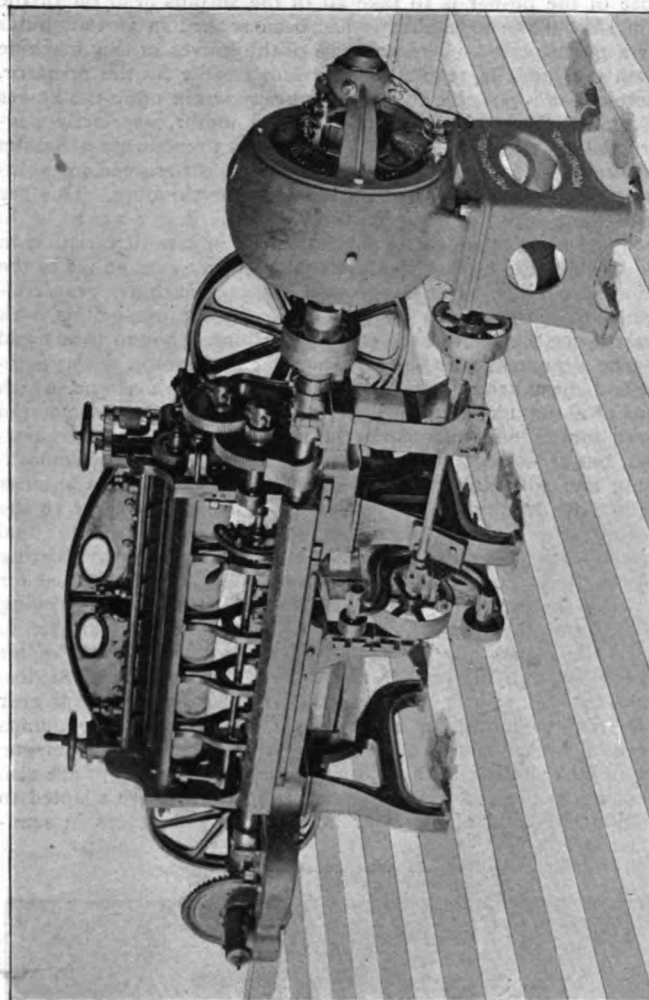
NORTHERN STEEL MOTOR, DIRECT CONNECTED TO BASSETT BELT KNIFE SPLITTING MACHINE.
